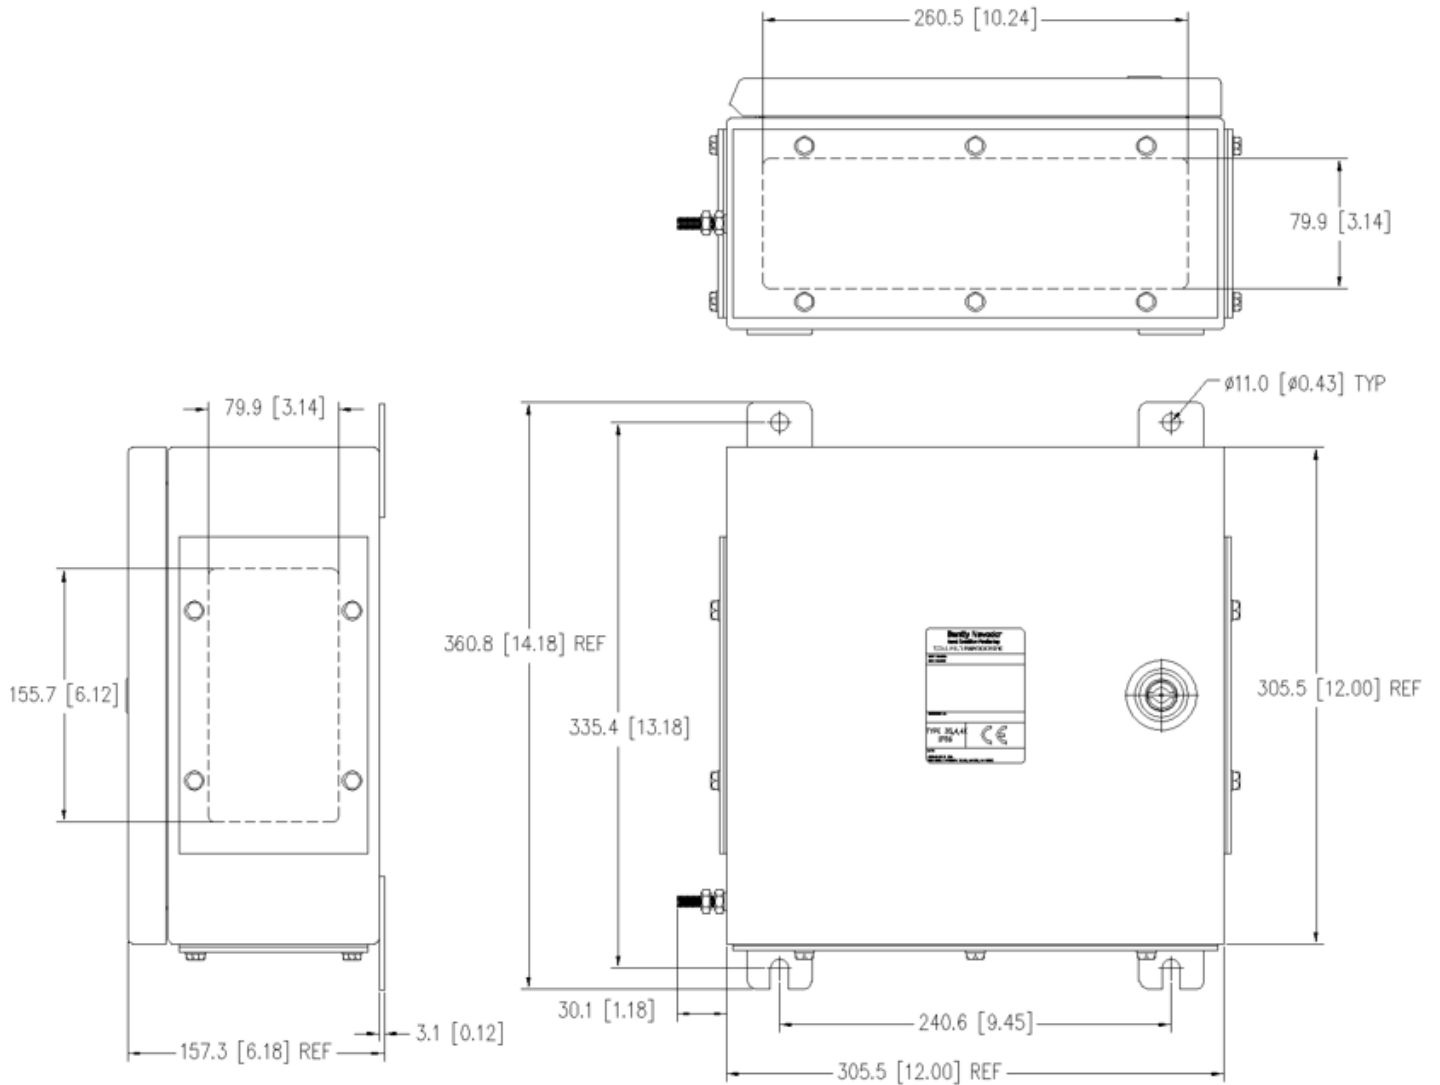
175751 3300 XL Multi-Purpose Housing Dimensions (12" x 12" x 6")
